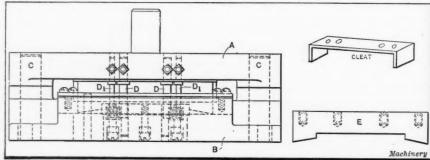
Punch and Die with Punch in Lowest Position; also Finished Cleat and Cutting and Forming Tool E
